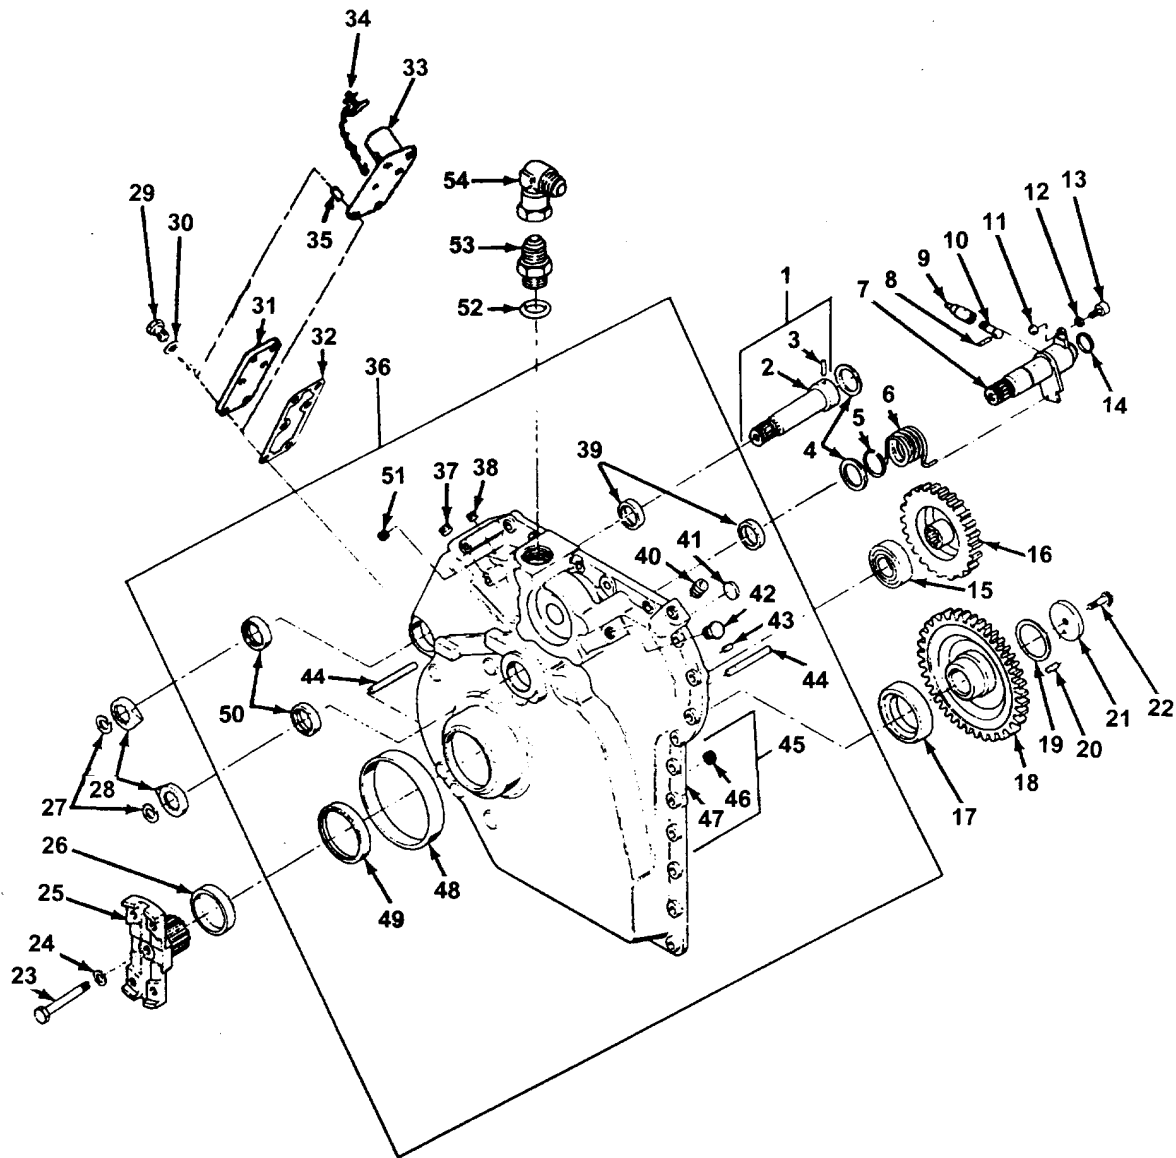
Right Hand End Cover and Brake Apply Cam Shaft.
